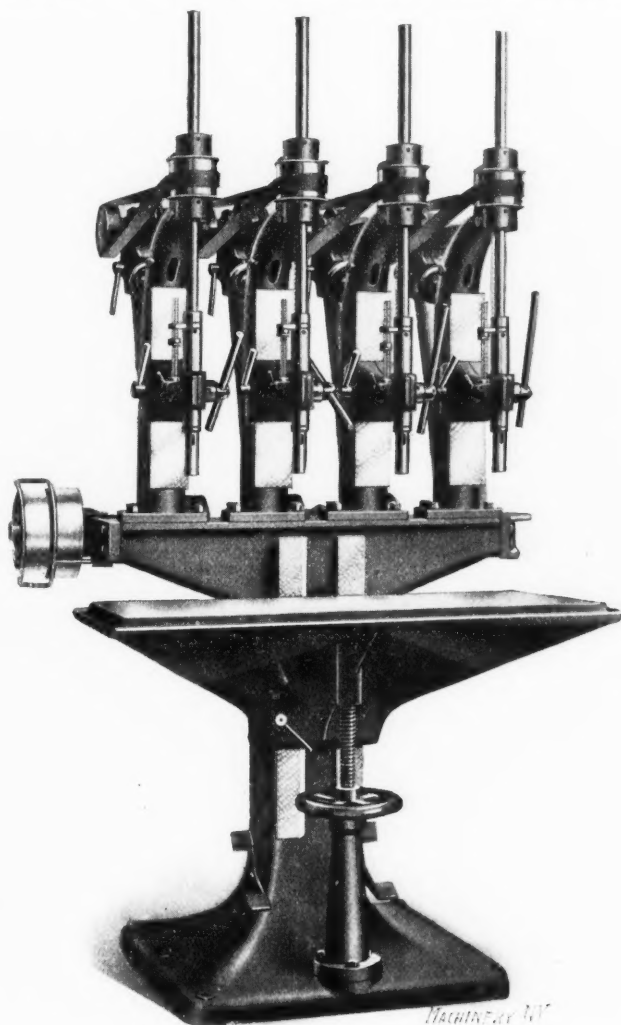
Sensitive Four-spindle Drill, built by W. H. Leland & Co., Worcester, Mass.
